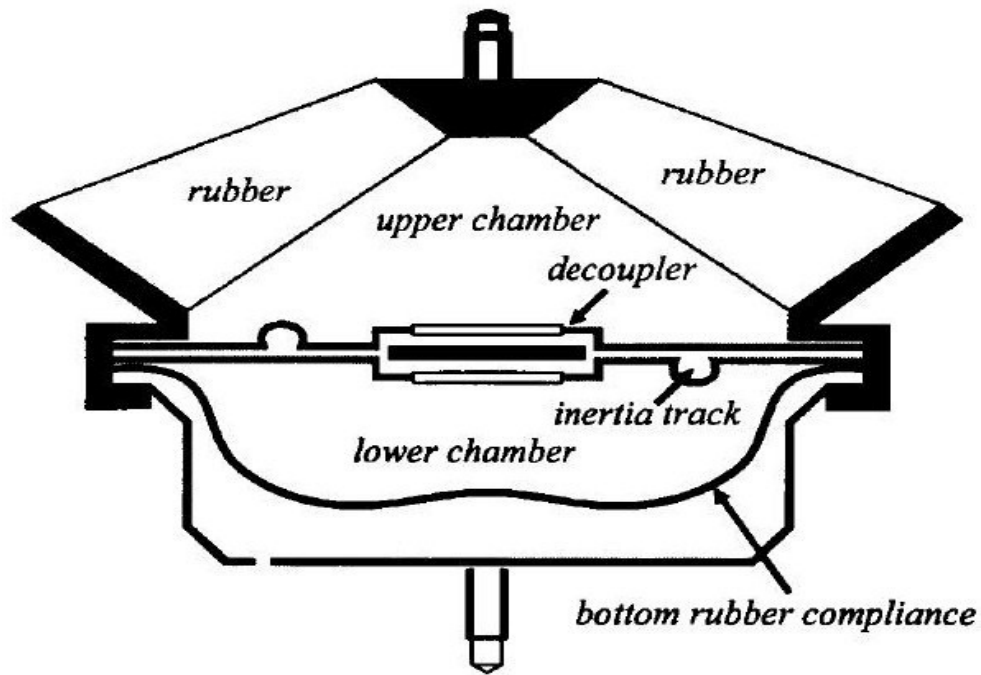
Schematic views of hydraulic passive engine mount [1]
